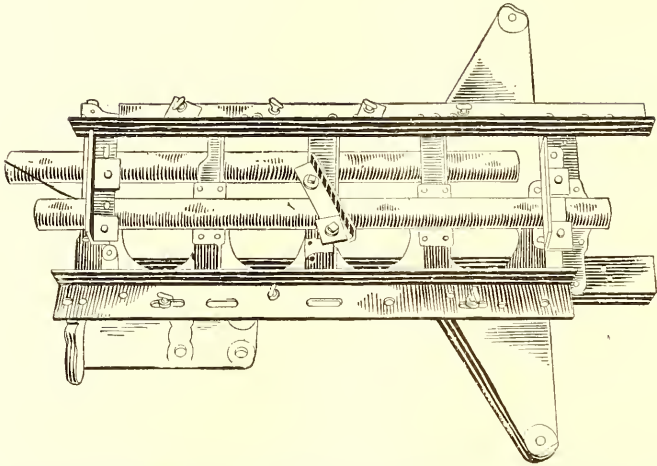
Crankcase with Angle Iron and Bearing Mandrels in Place.
